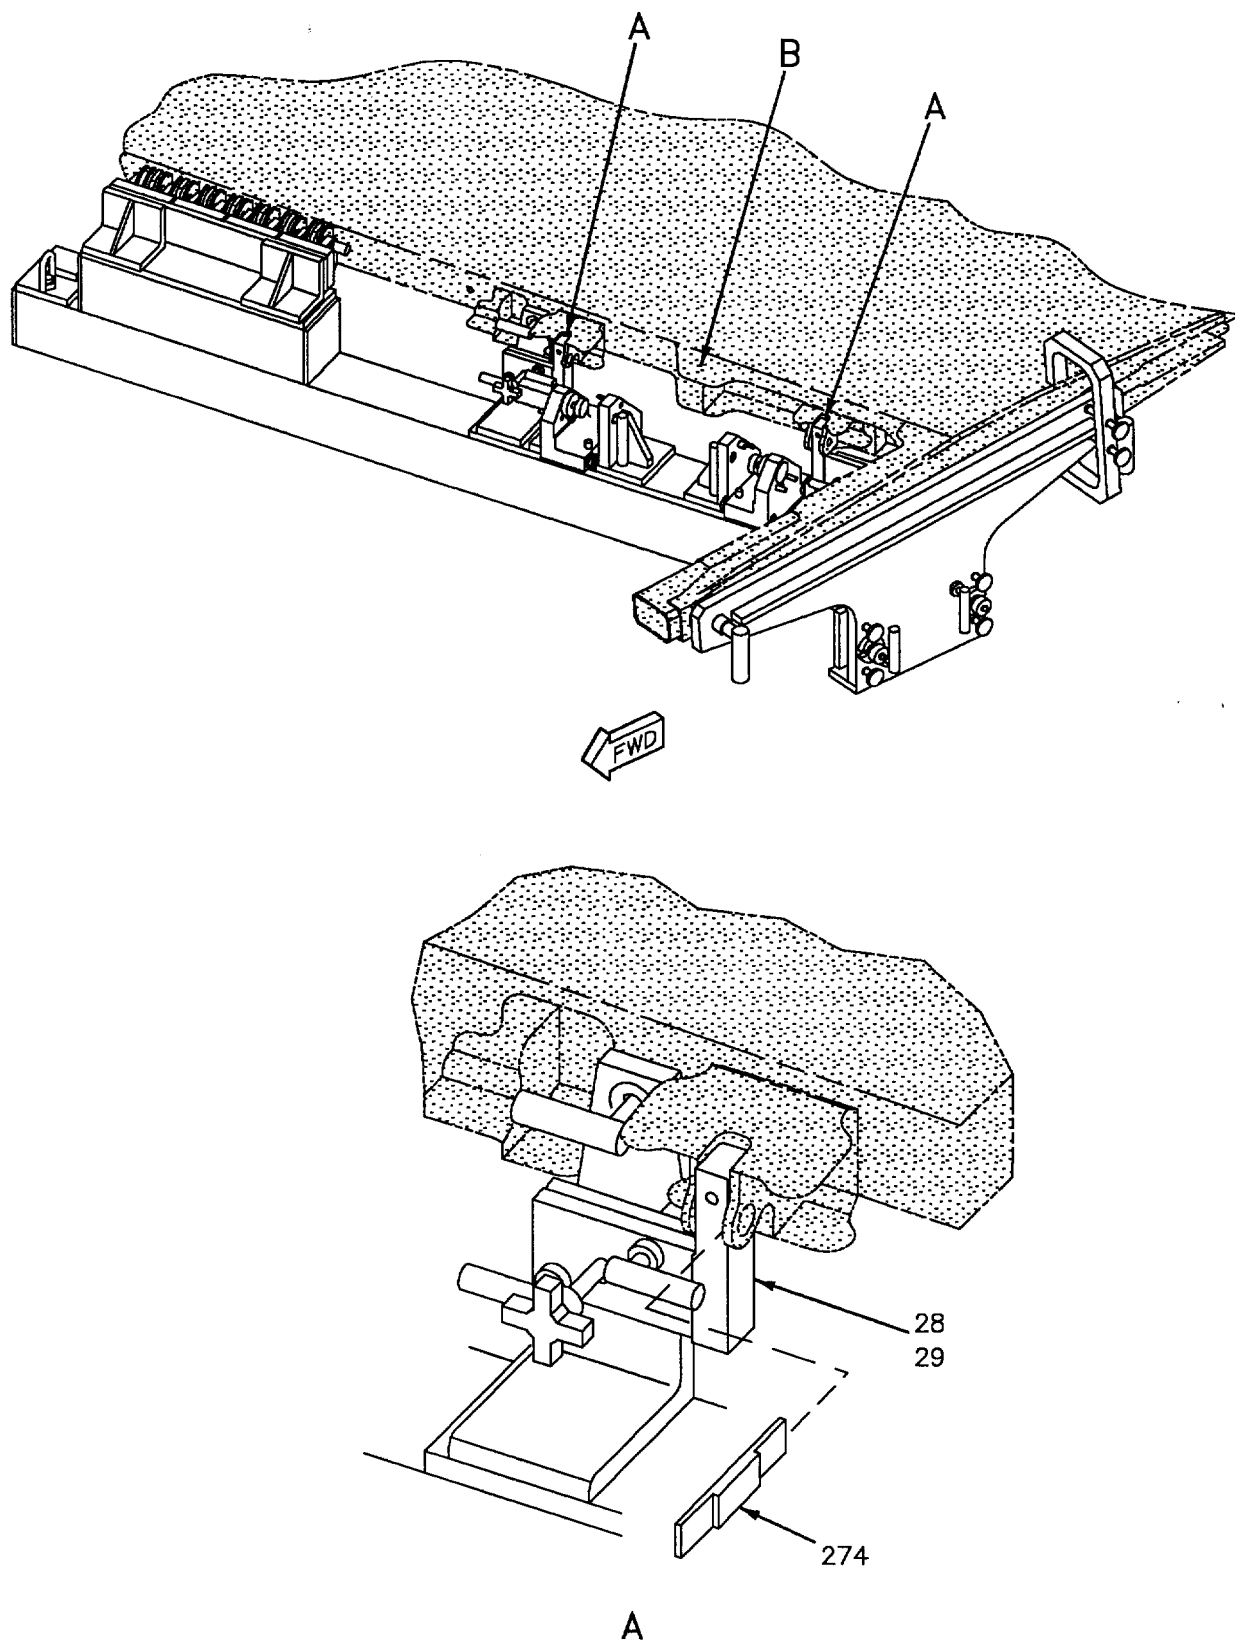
Inspection of Hinge Halves, 74A150678 and 74A150679 (Sheet 1)
